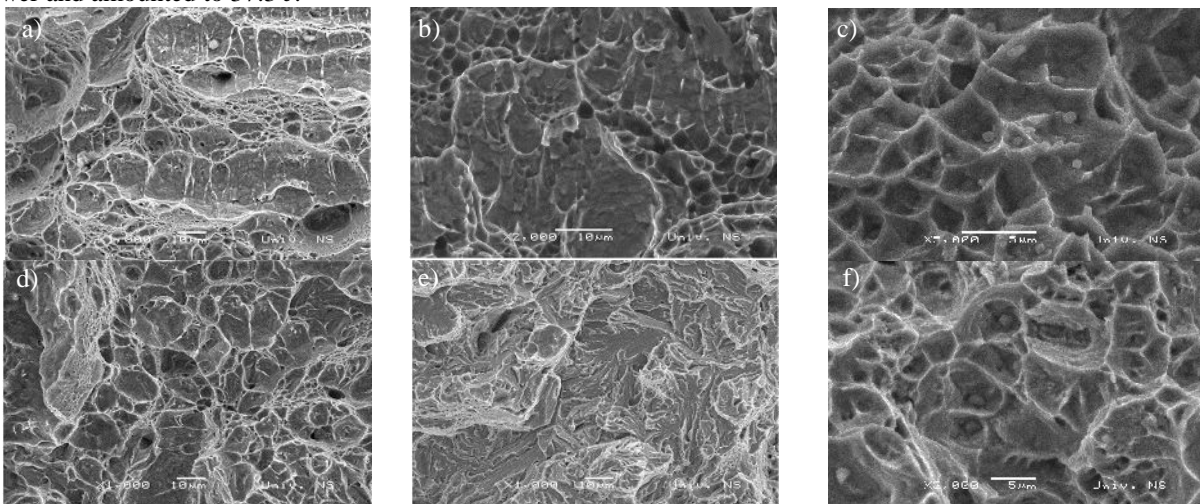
SEM fractograph of Charpy impact specimens fractured at 20 °C a) base metal, b) HAZ and c) weld metal. SEM fractograph of Charpy impact specimens fractured at -40 °C d) base metal, e) HAZ and f) weld metal.
